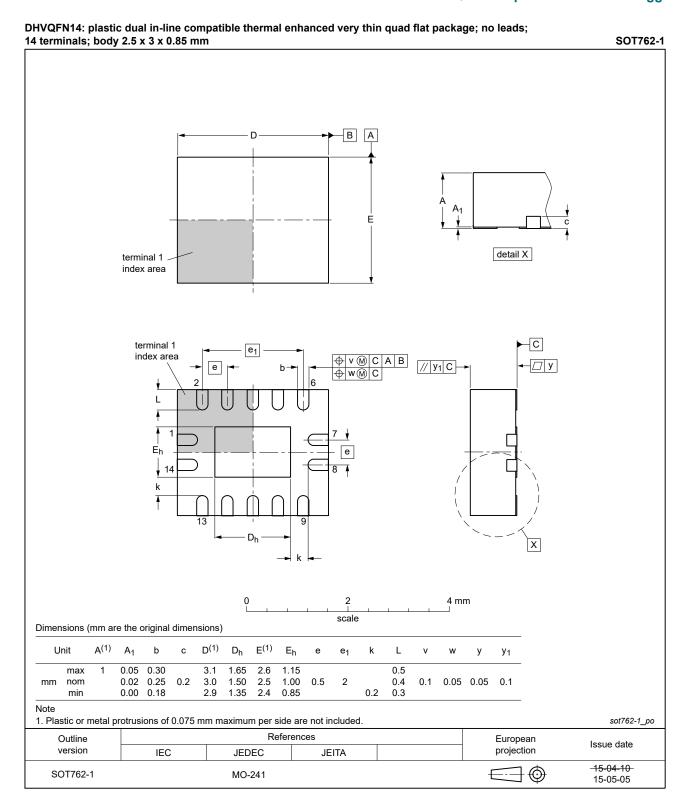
Package outline SOT762-1 (DHVQFN14)
